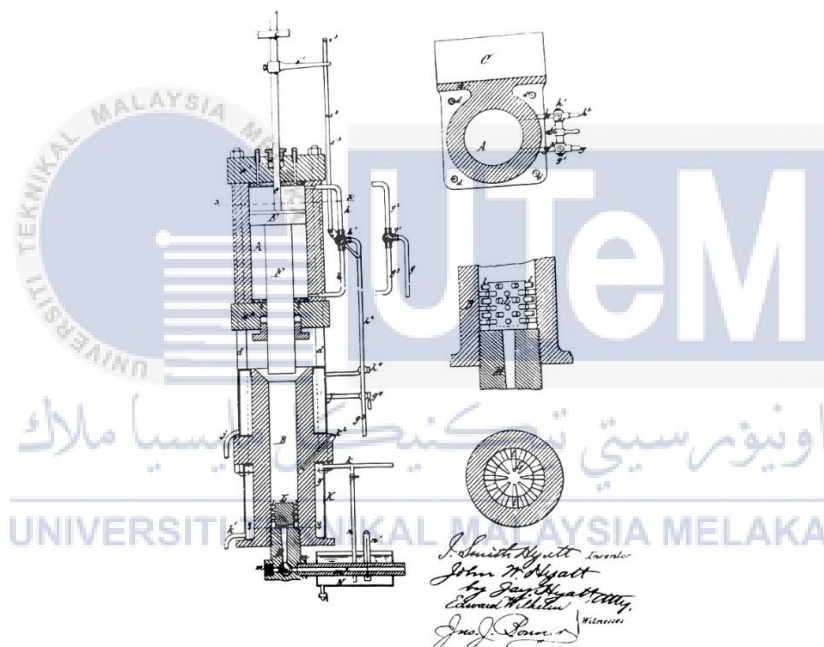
2 Hyatt Brothers' First Injection Molding Machine 1872.
